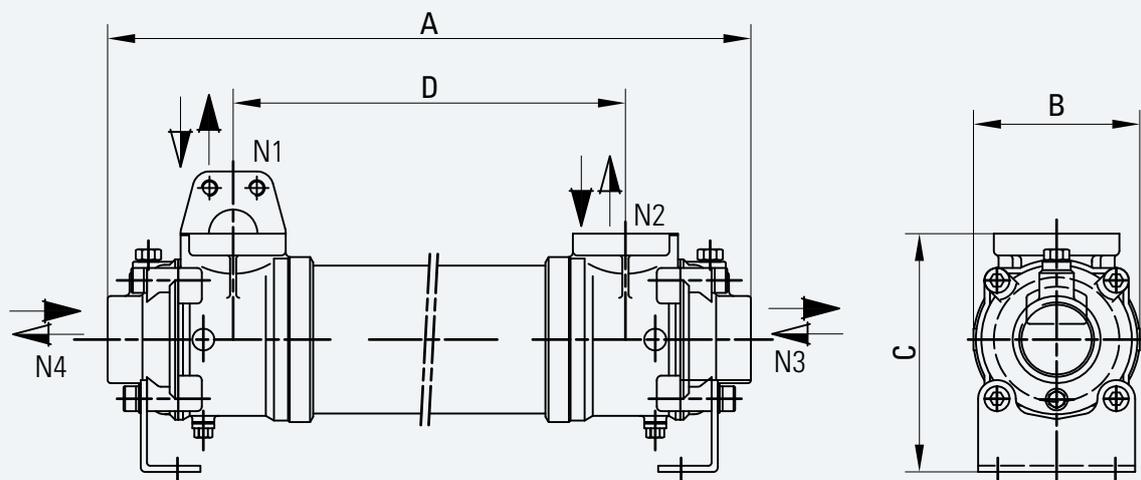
Fuel oil cooler for MDO operation DH3
